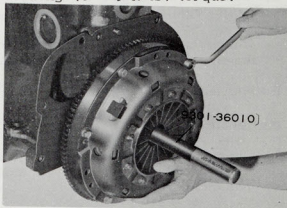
Installing Clutch Cover & Clutch Disc W9152
